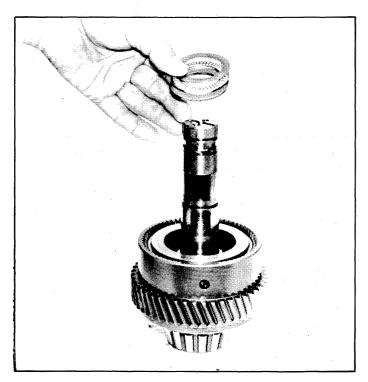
Removing or Installing the Clutch Hub and Pinion Assembly.
